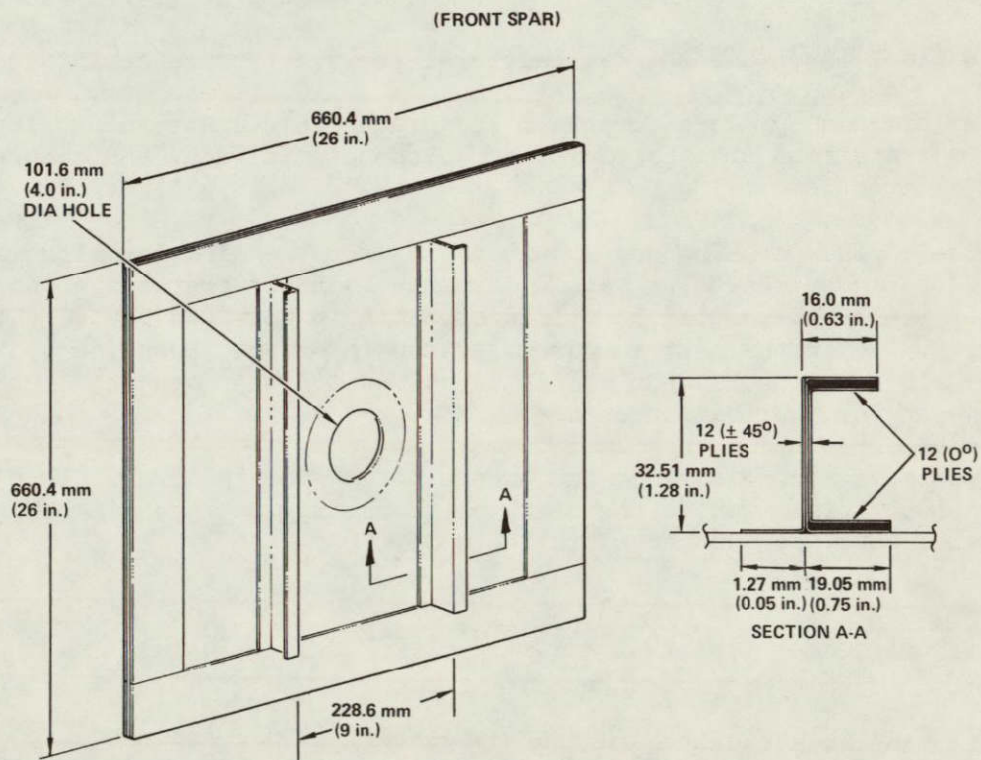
Hand Hole Reinforcement Shear Web Test Specimen
